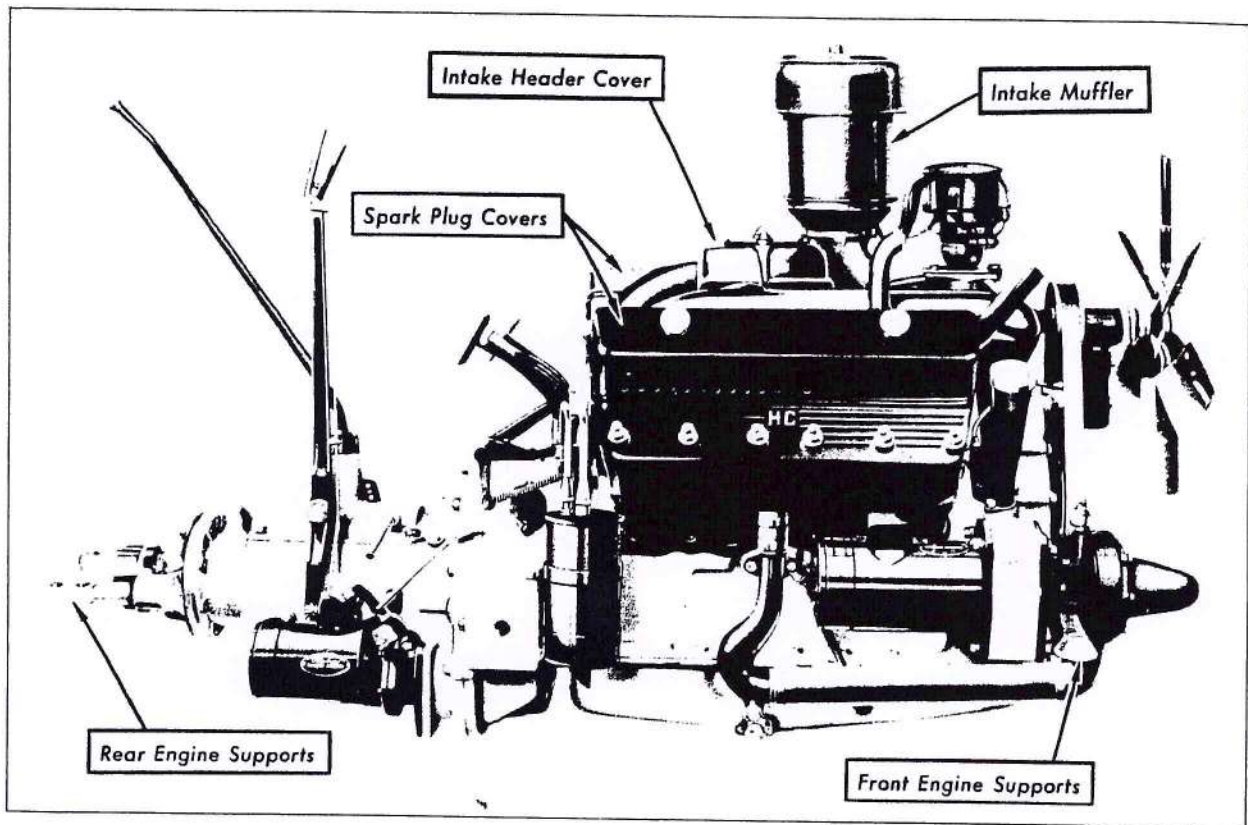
The Cadillac 355 engine. The La Salle 345 is the same except in appearance and method of mounting.
